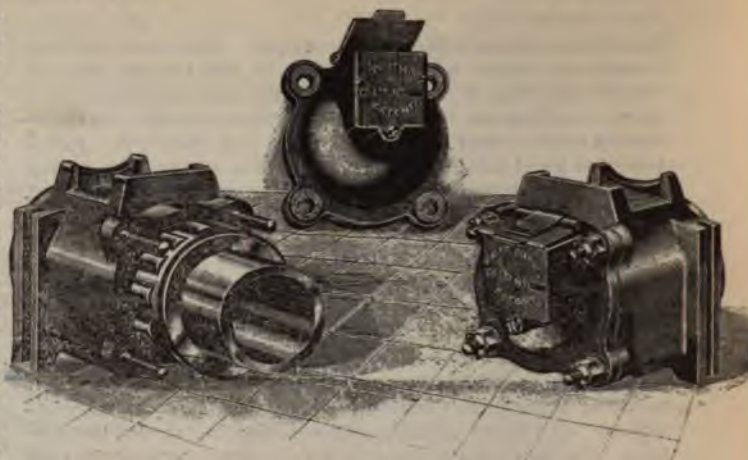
ROLLER BEARINGS FOR HEAVY VEHICLES.
